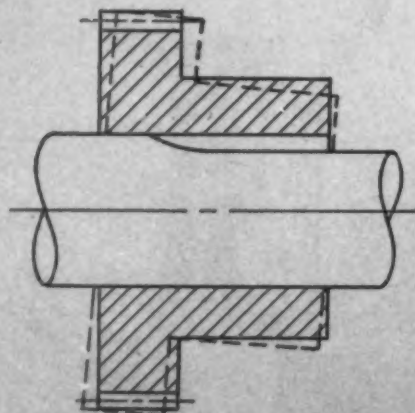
Lack of symmetry in parts can produce a cocked fit on assembly as shown
